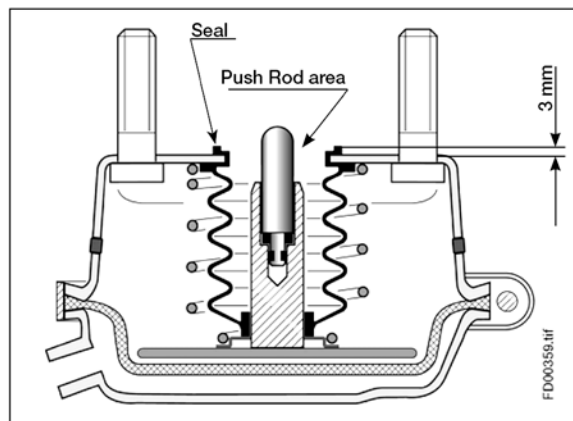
FRONT AXLE BRAKE AIR CHAMBER 12158
